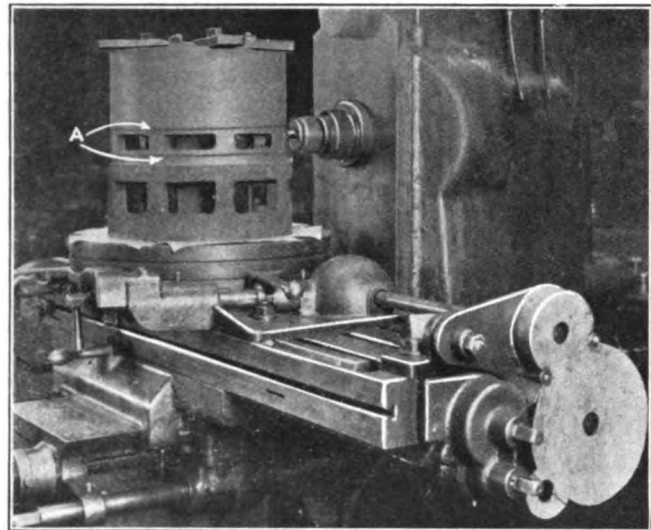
MILLING PORTS IN A VALVE BUSHING
